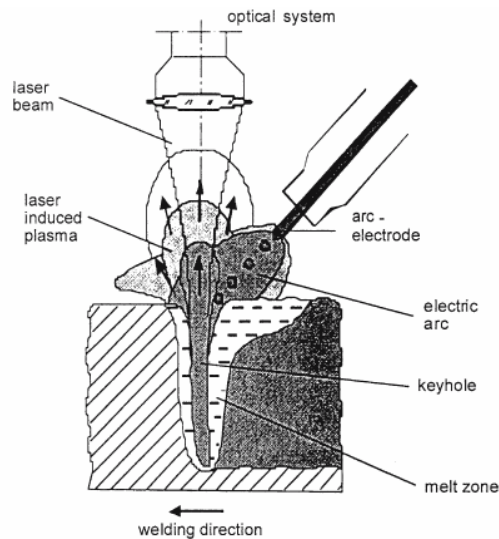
, Laser-MIG/MAG welding process [10]
